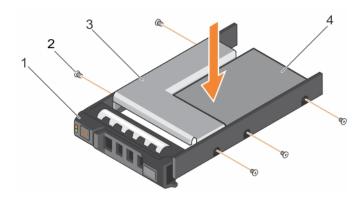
Installing a 3.5-inch hard drive adapter into a hot swappable hard drive carrier
